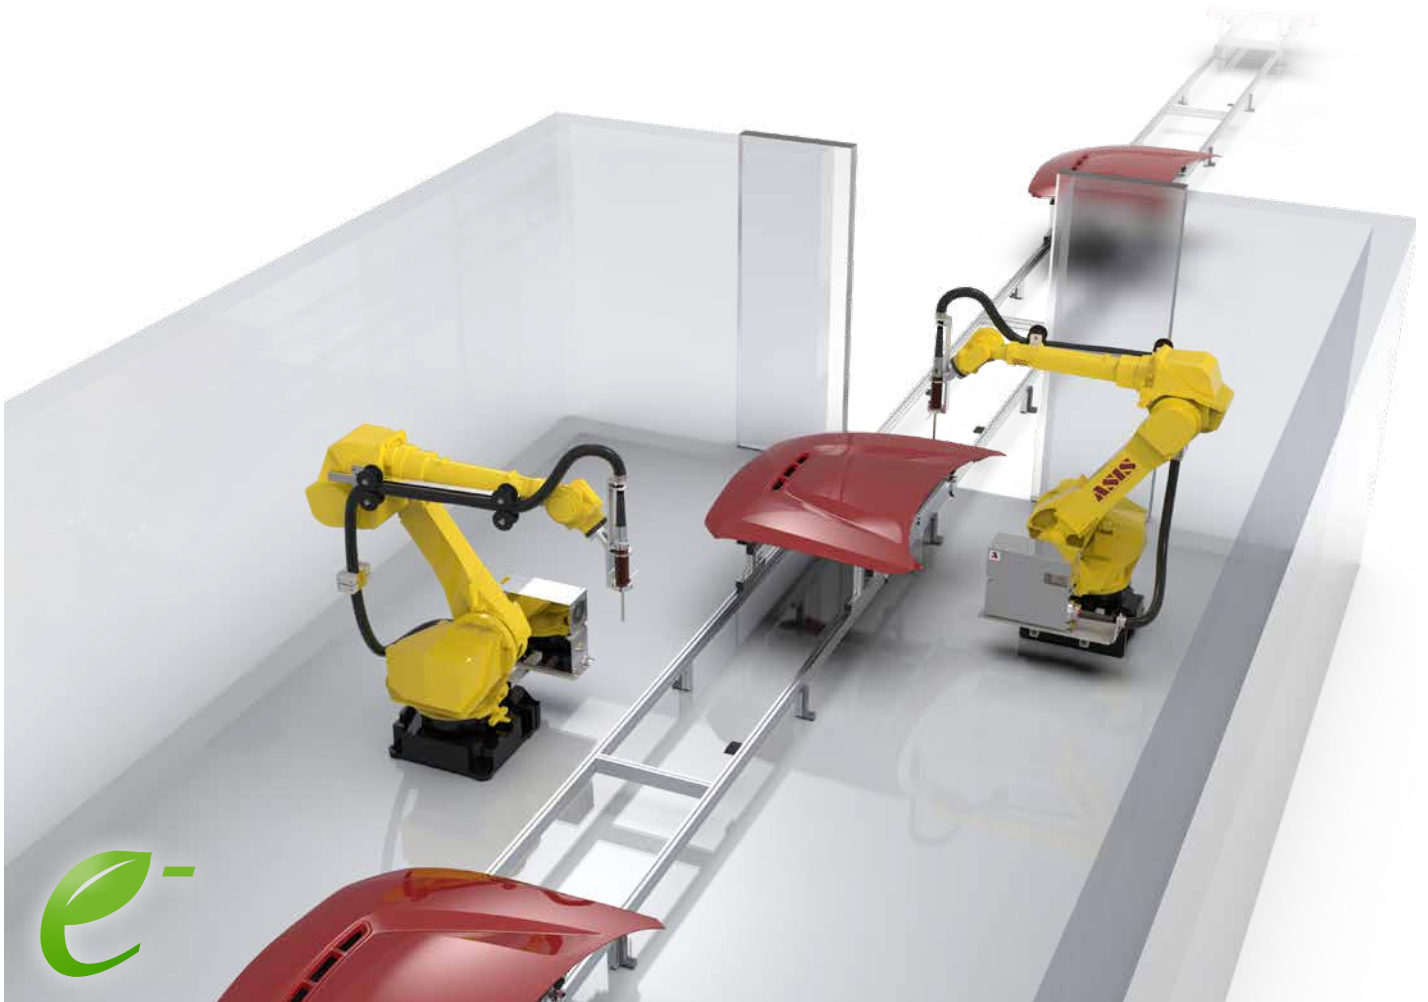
Robot coupling of a finger emitter for the purpose of edge layer modification of three-dimensional form parts
